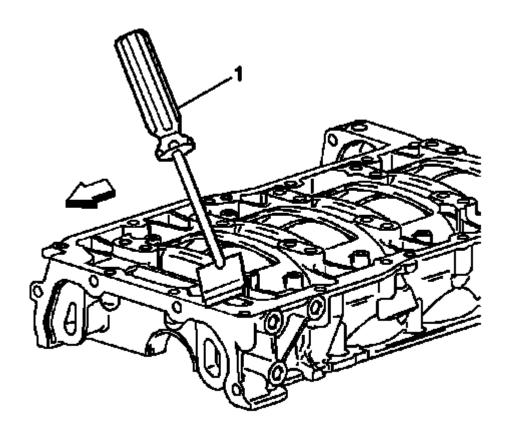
Clean Sealing Material From Gasket Mating Surfaces On Lower Crankcase Engine Block Side With Suitable Tool
